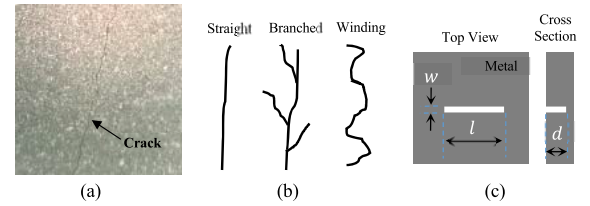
(a) Photograph of a natural fatigue crack in steel. (b) Illustration of typical crack shapes. (c) Common crack model.
